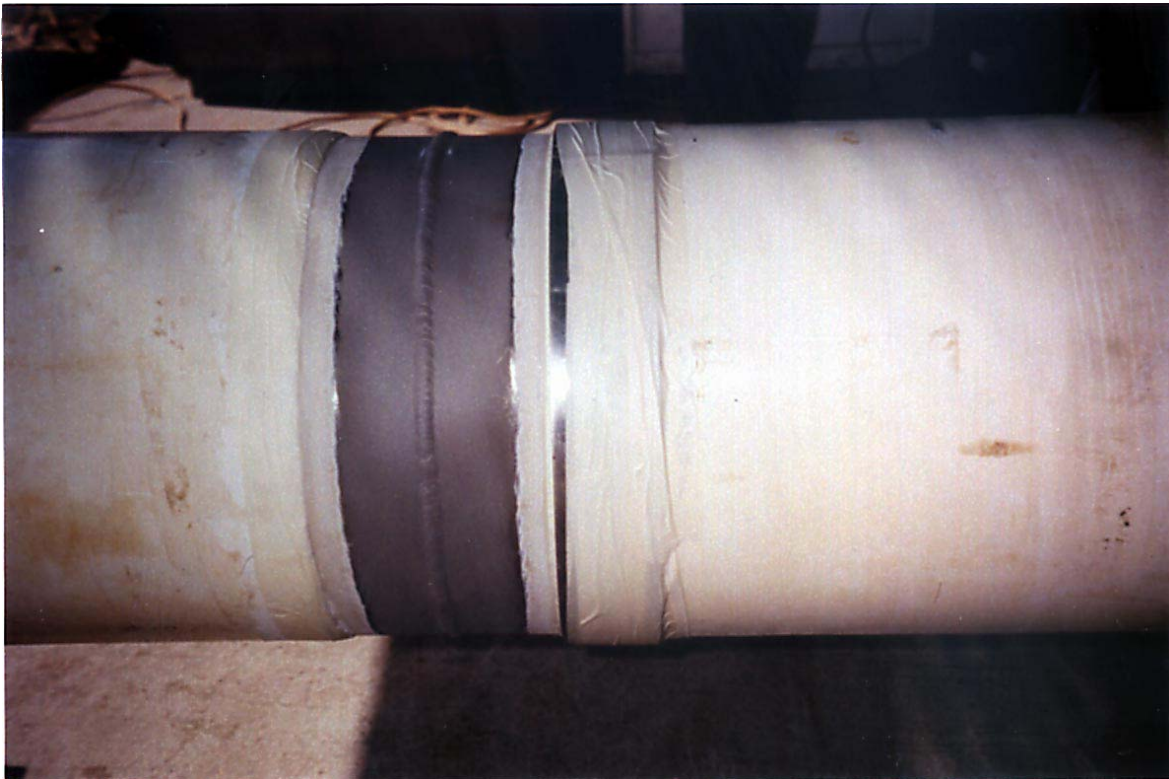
A welded pipeline joint surface after surface preparation and in readiness for coating.
